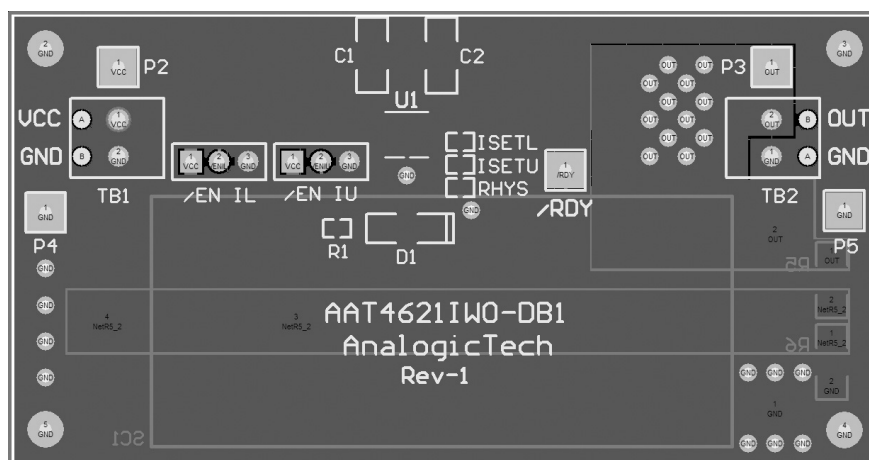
AAT4621 TDFN33-14 Evaluation Board PCB Bottom Side
